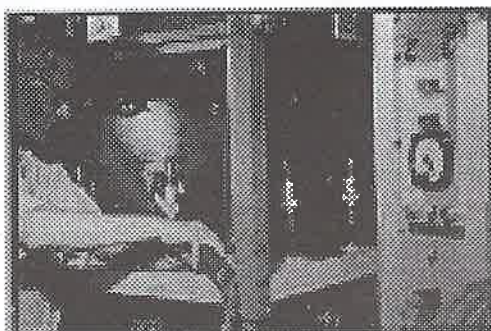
Pinching off a Manifold Pumped vacuum Switch at ALSTOM, Rugby, England.
